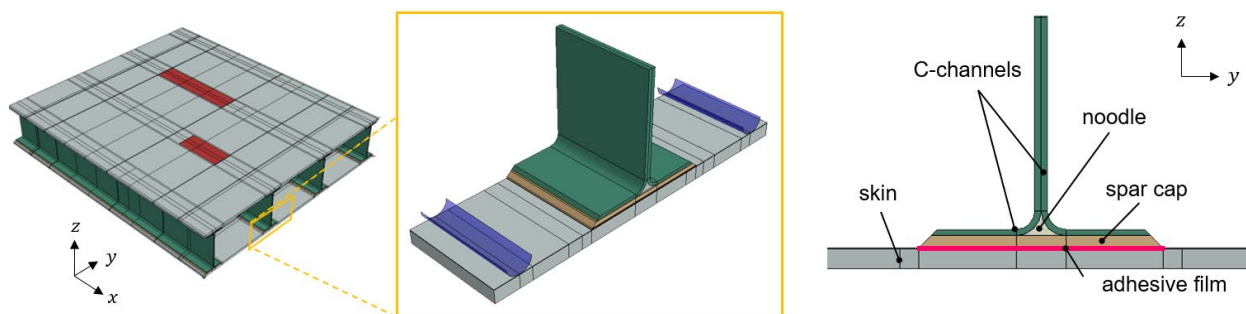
T-joint representing a repeat unit of a wing box and schematic cross-section of the bonded composite T-joint specimen.
